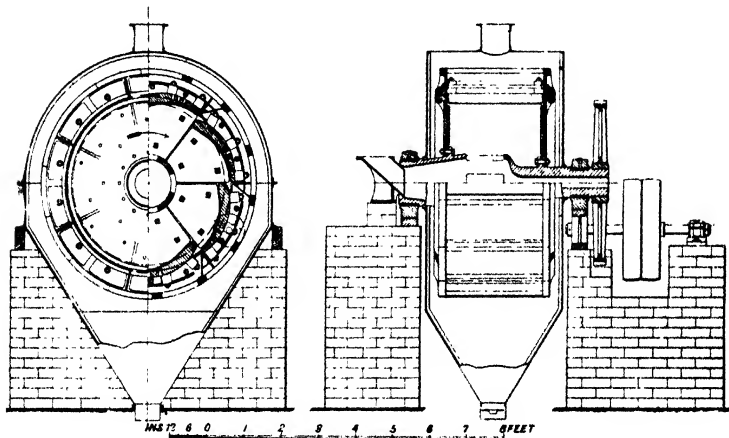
Ball mill. Front and side elevations ; partly in section.
